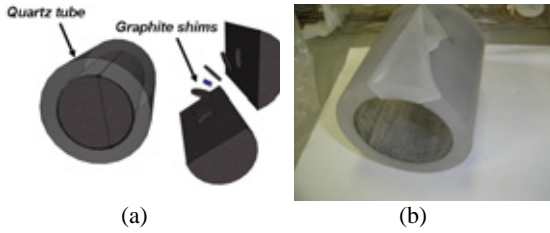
Bonding fixture (a) 3-D schematic illustrating the tube and fixture design (b) Glass tube thermal failure.
